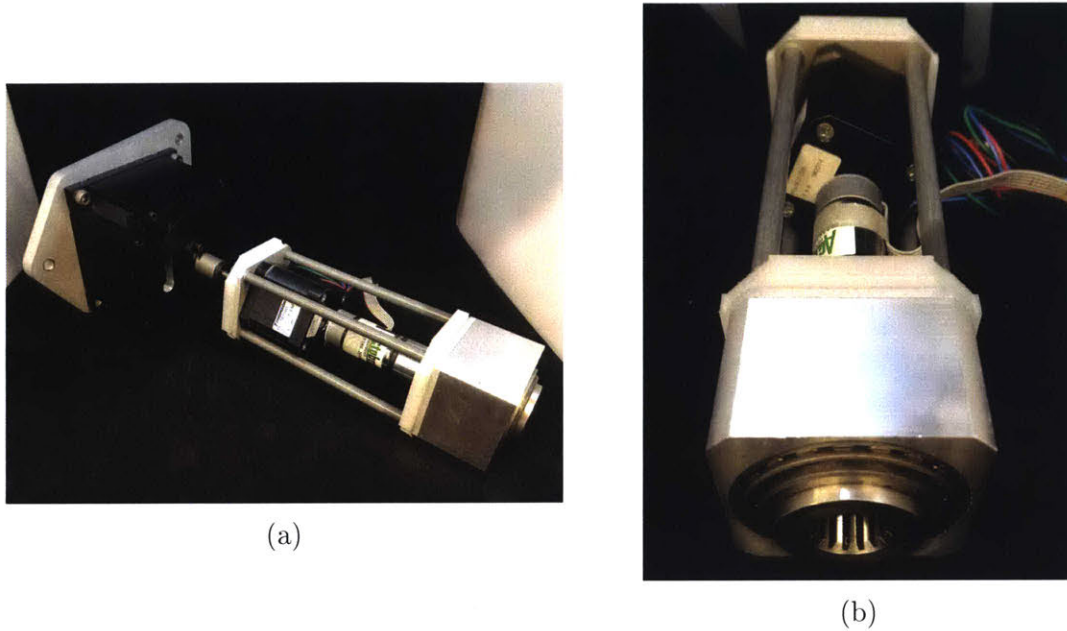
Fabricated bearing cart system with a close-up of the bearing block.
